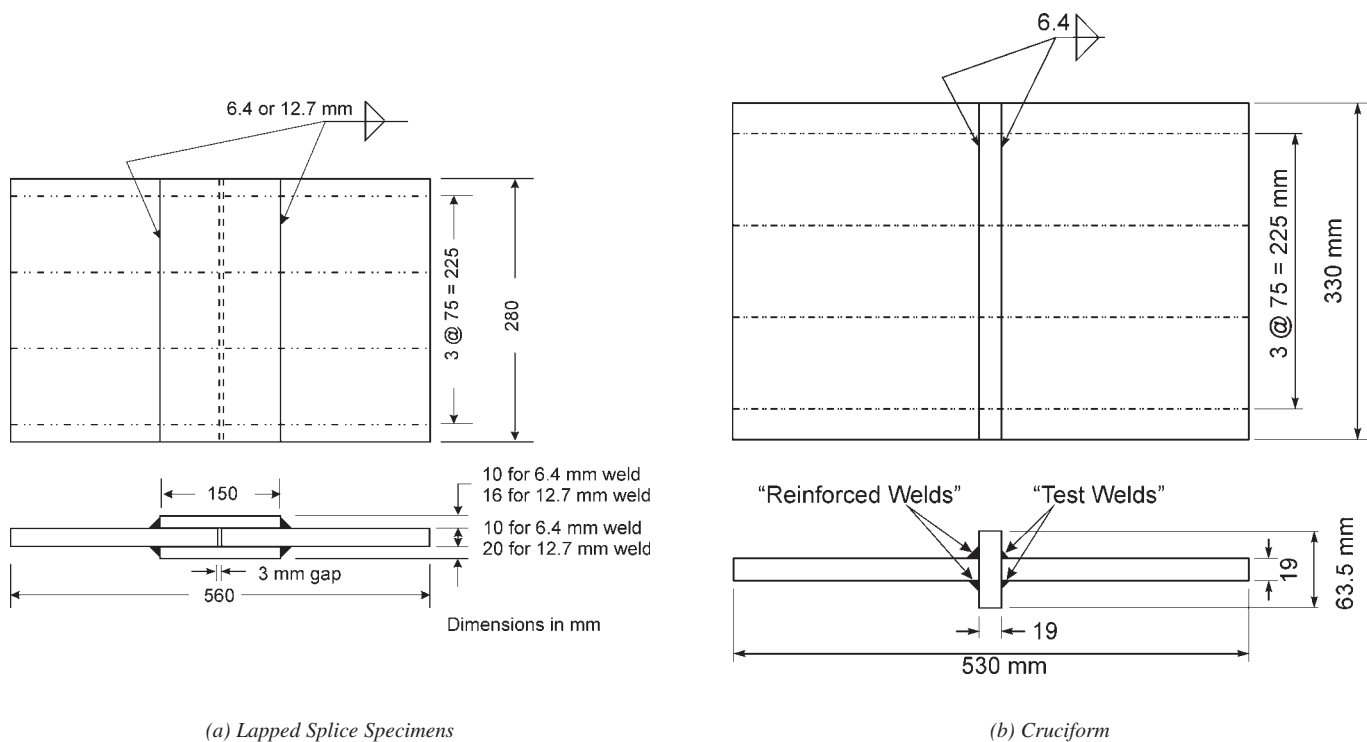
Transverse Fillet Weld Test Specimens.
